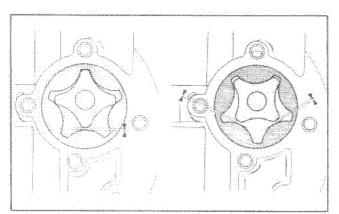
Pump clearance checking points - 807/841/843 engines
